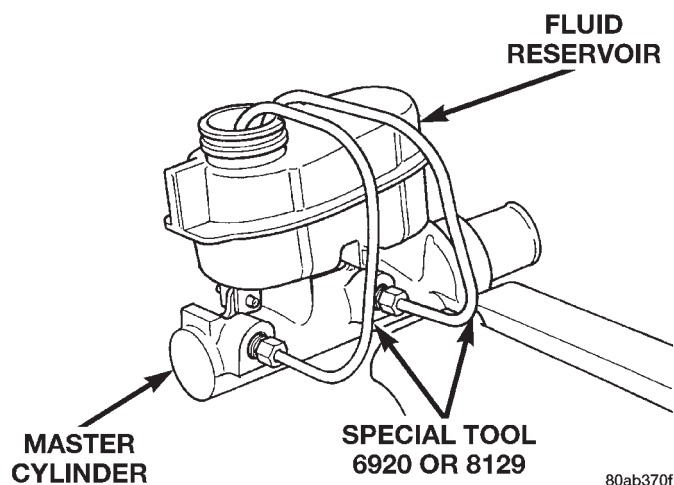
Bleeding Tubes Installed On Master Cylinder
